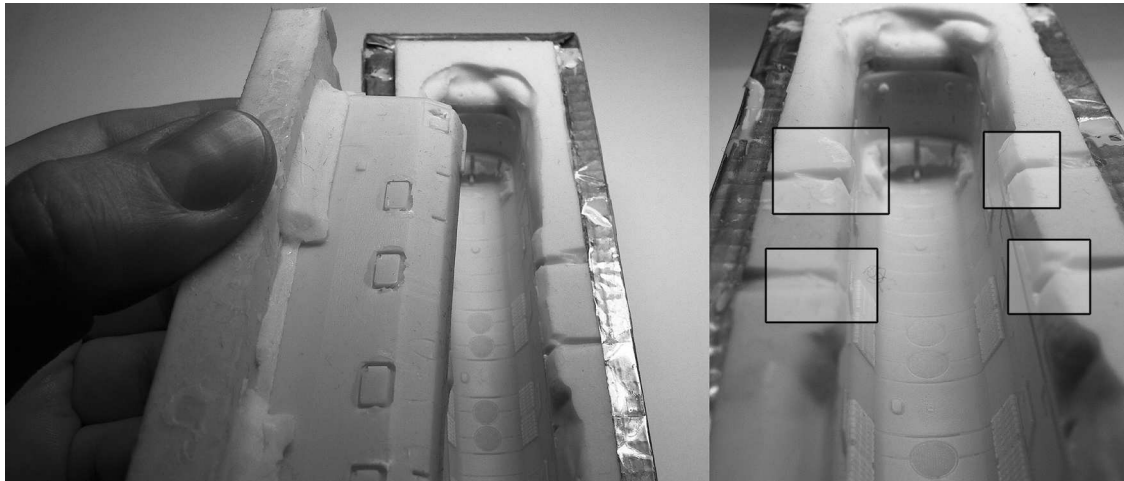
Two halves of the mold—the highlighted areas show the draining channels cut into the mold after casting the silicone rubber pieces
